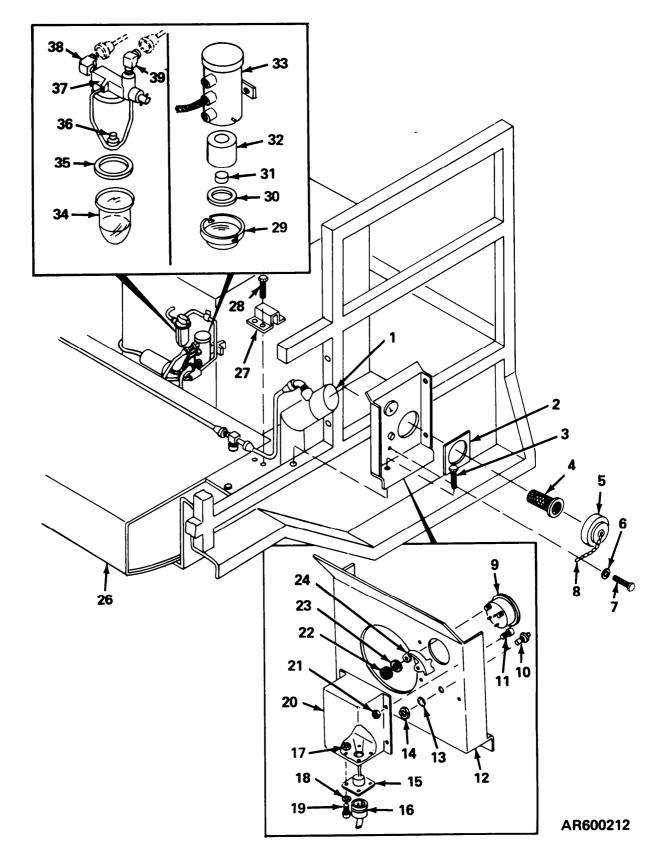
Fuel tank strainer, gage, switch, pump, and filter, exploded view.
